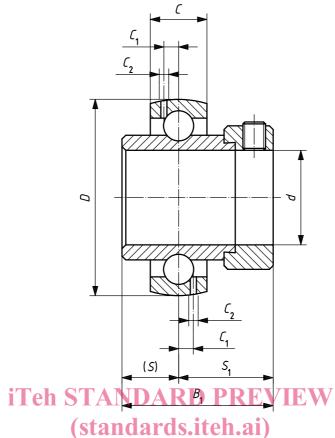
Bearing with eccentric locking collar — Wide overall width
